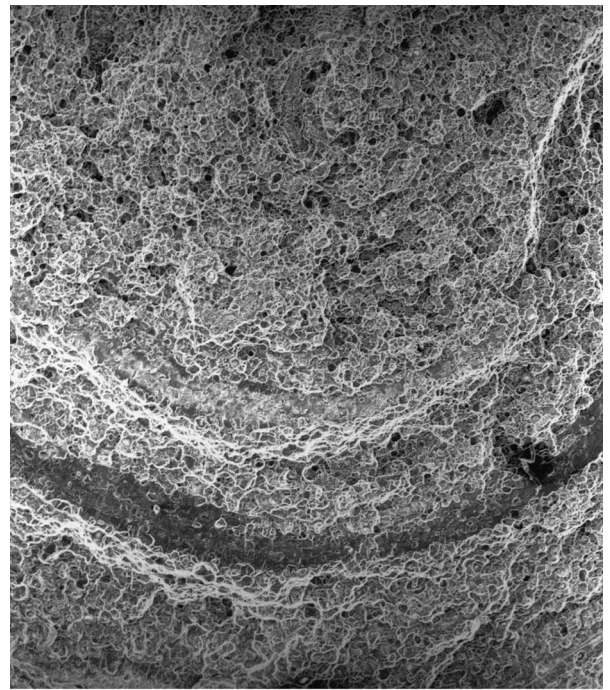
Fatigue failure in an MMC/MMC joint showing evidence of spiral deformation on the fracture surface (magnification  $\times 24$ ).
